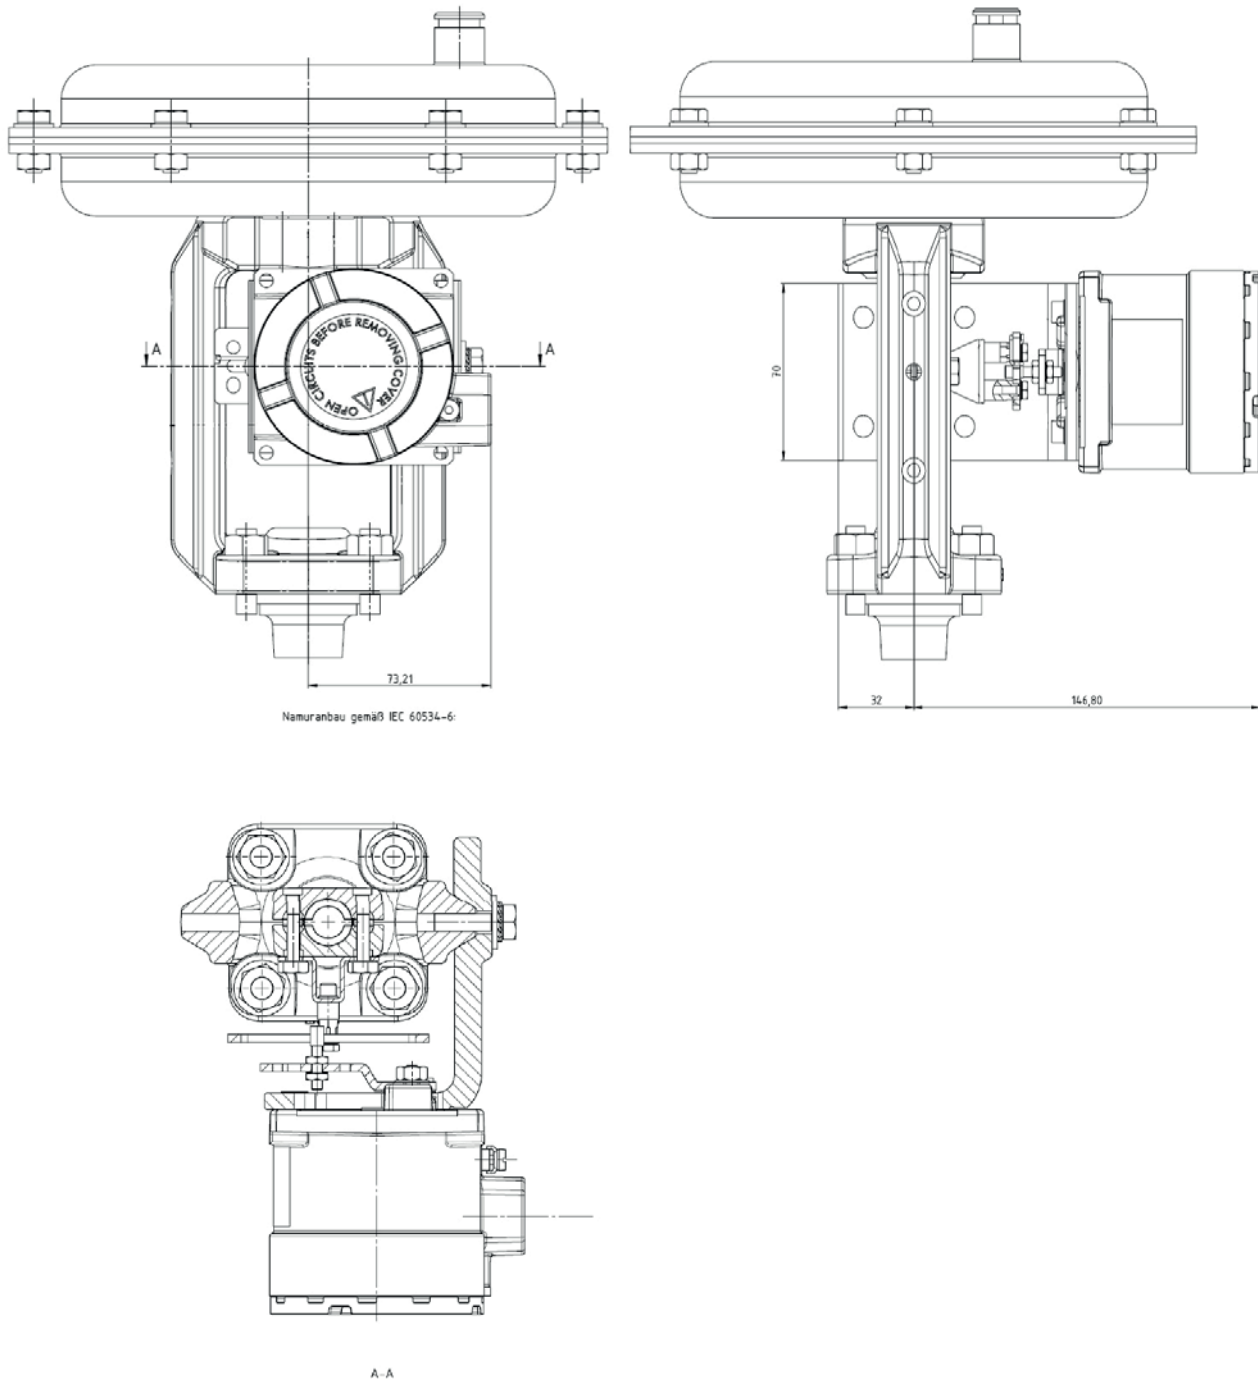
Attachment to linear actuators with NAMUR rib (IEC 60534-6)
